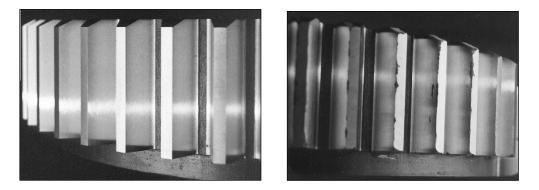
Newly manufactured gear (left) and regenerated gear (right)
